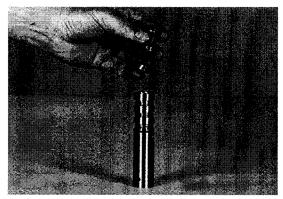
Remove regulator spool stop, spring and spring and sleeve assembly.
